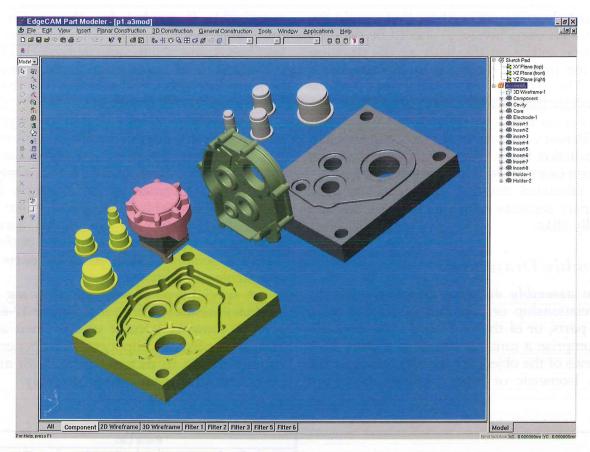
An exploded assembly drawing shows the assembly of a number of components, typically in pictorial form. (EdgeCAM/Pathtrace)
